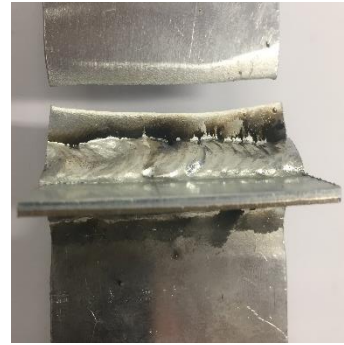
Tensile static failure of cruciform-welded joints (short-term).
